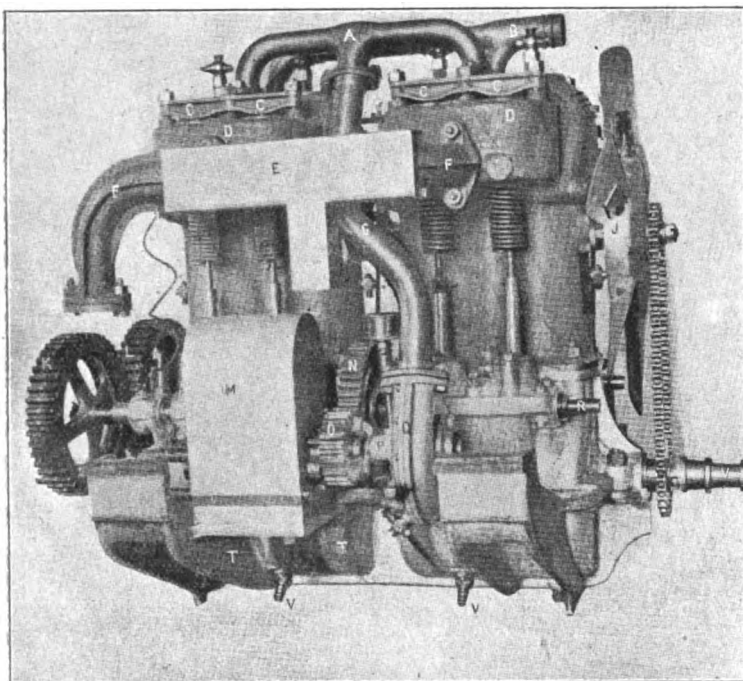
VIEW OF MERCEDES MOTOR. EXHAUST VALVE SIDE.
